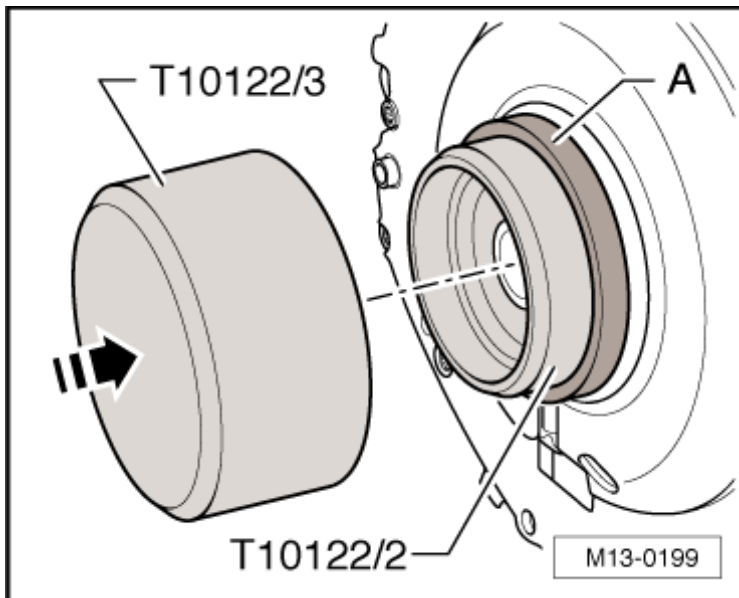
Installing Pull Sleeve T10122/2 With Sealing Ring Onto Crankshaft
